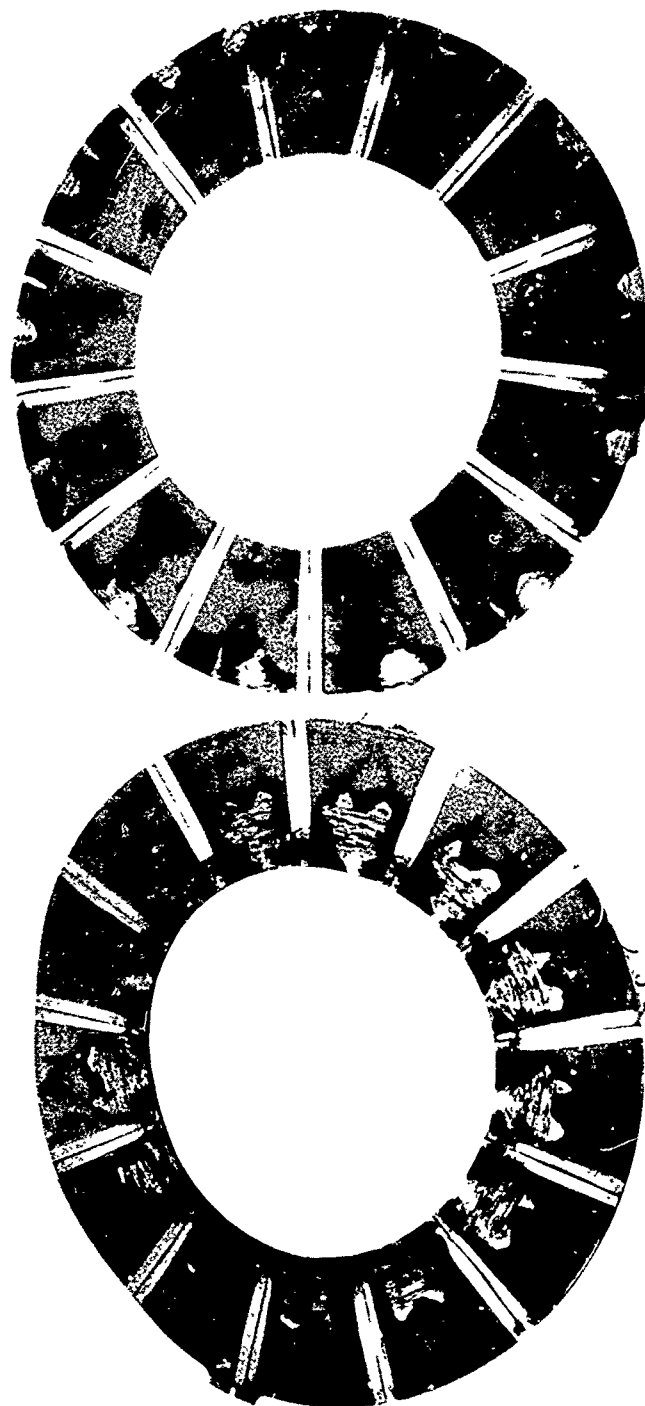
Journal Bearing Test Rig Thrust Bearing Failure.
